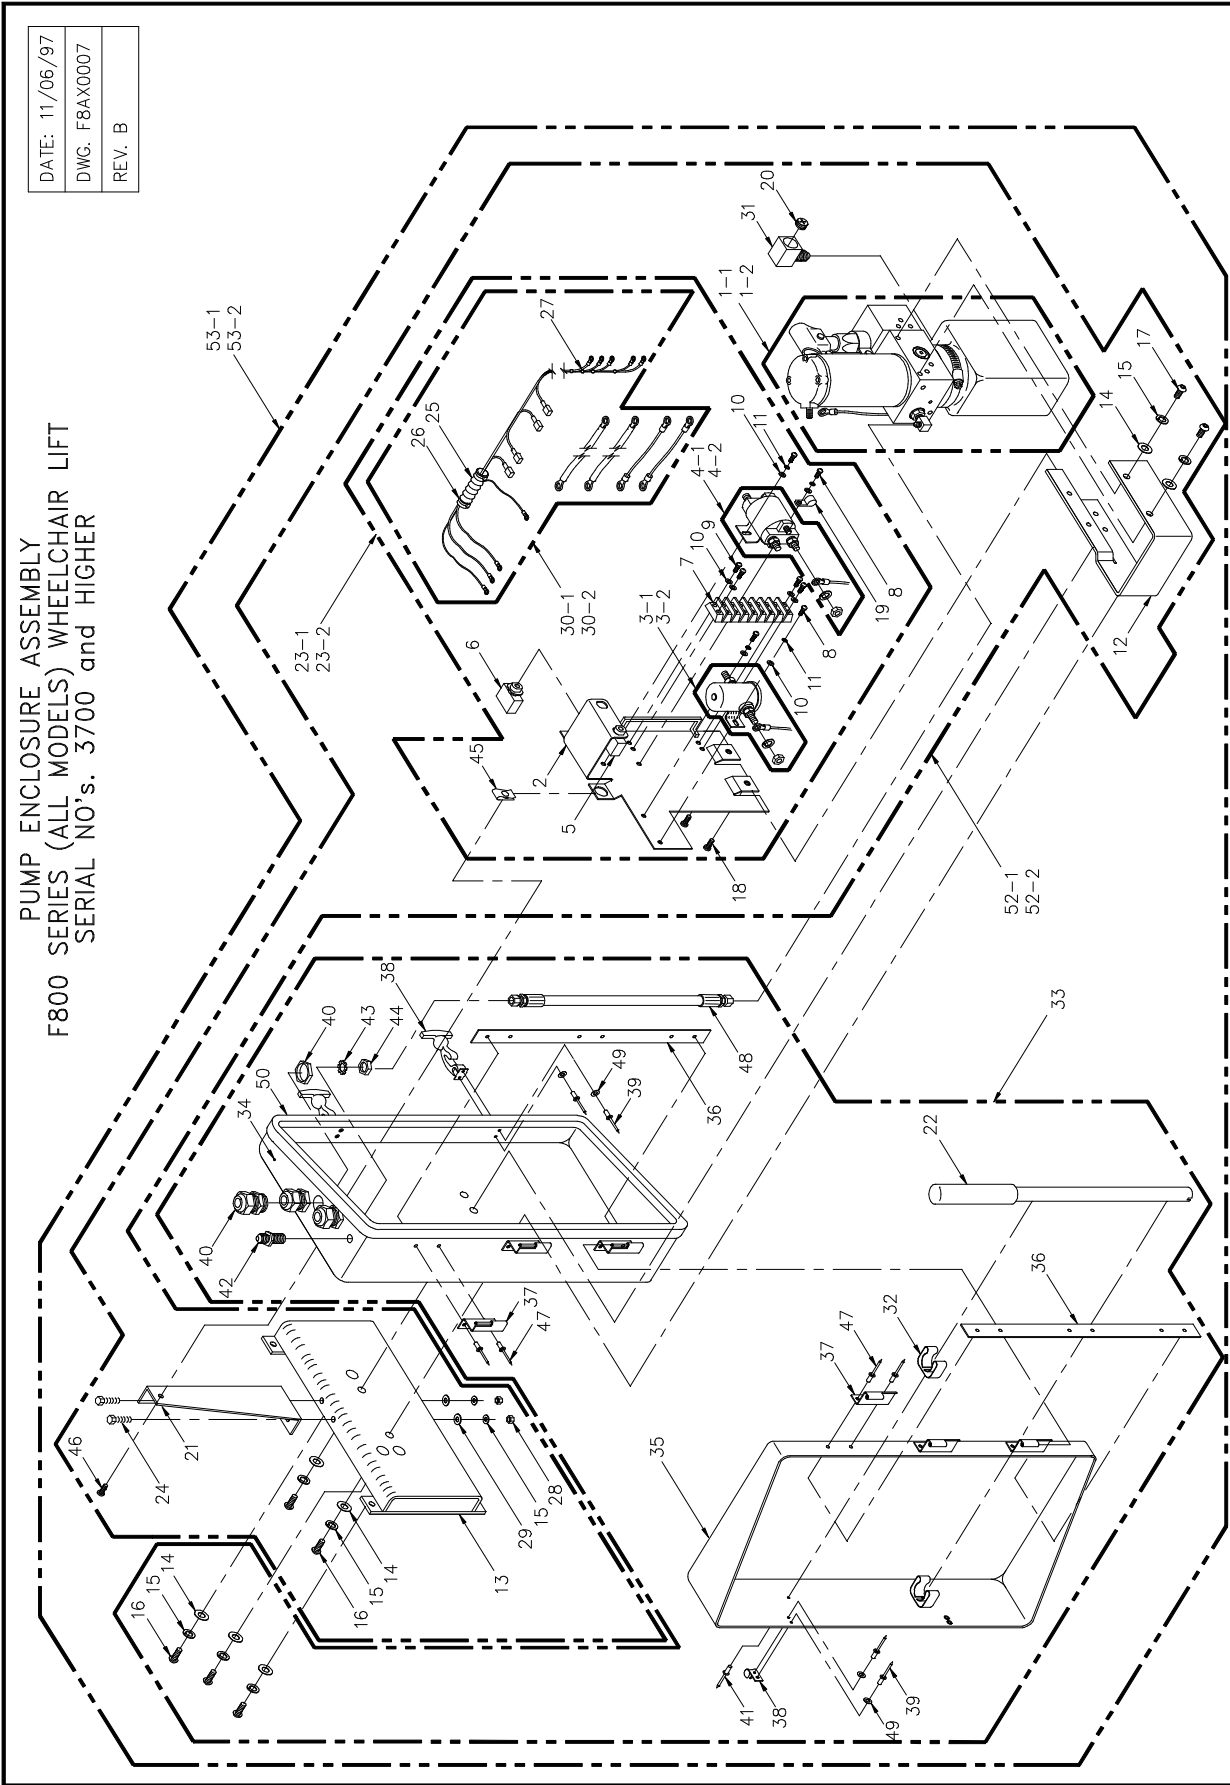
OPTIONAL PUMP ENCLOSURE ASSEMBLY
